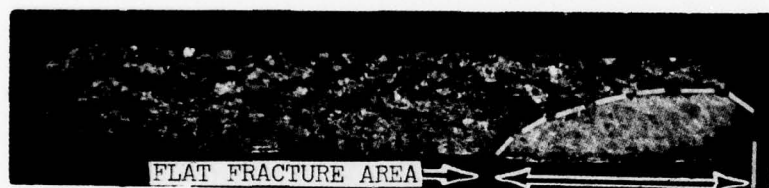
FRACTURE INTERFACE OF BEND TEST COUPON S/N 7-3.
